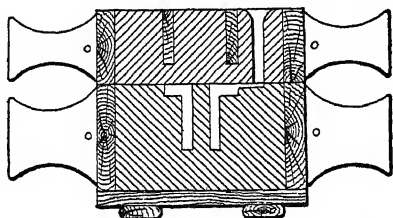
SECTION OF FOUNDRY FLASK AND MOLD
